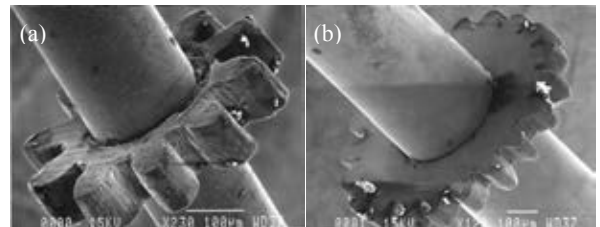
SEM photographs of processed micro-gears. (a) Small and (b) large gear.
